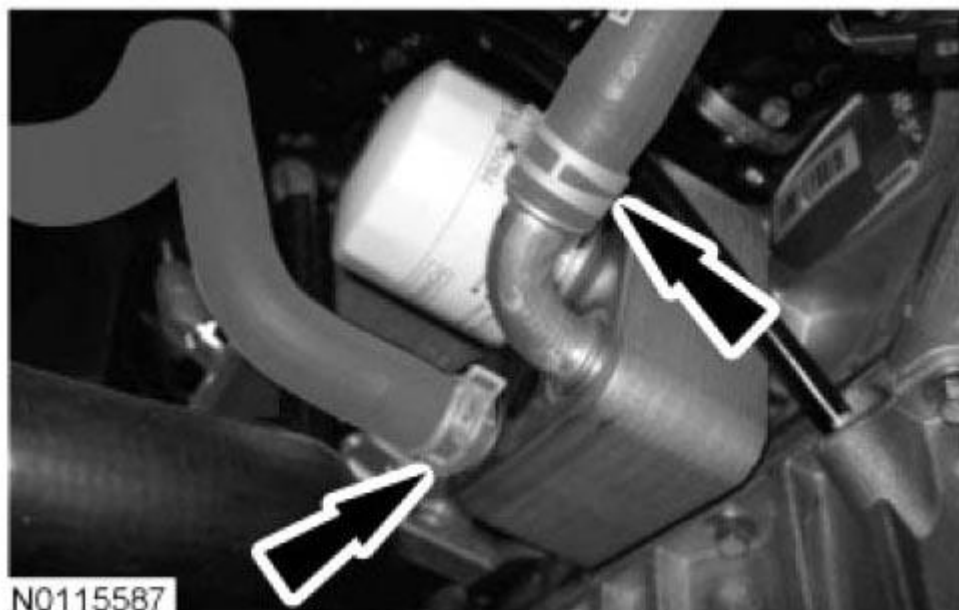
Locating Coolant Hoses To Engine Oil Cooler
